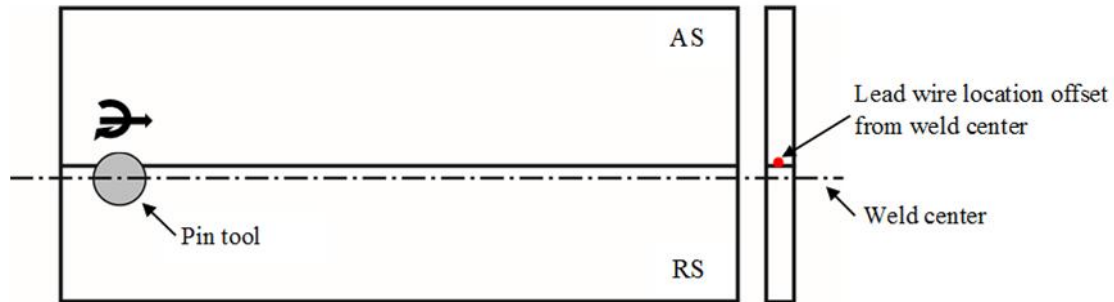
Configuration of the metal plates for the butt welds.
